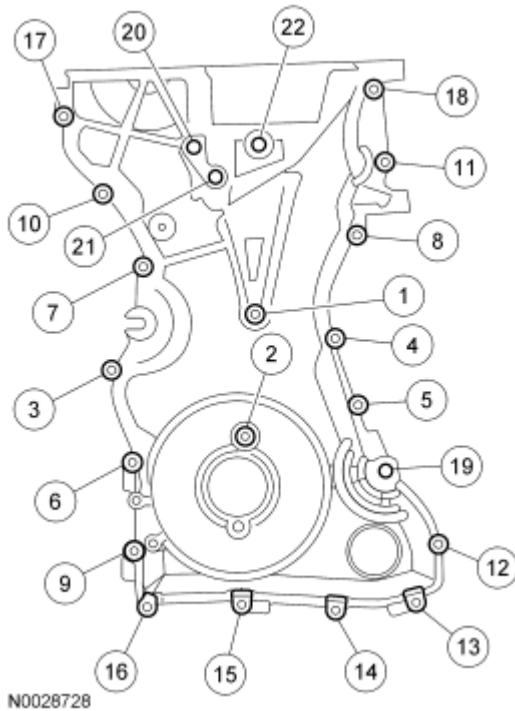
Identifying Engine Front Cover Bolts Tightening Sequence
